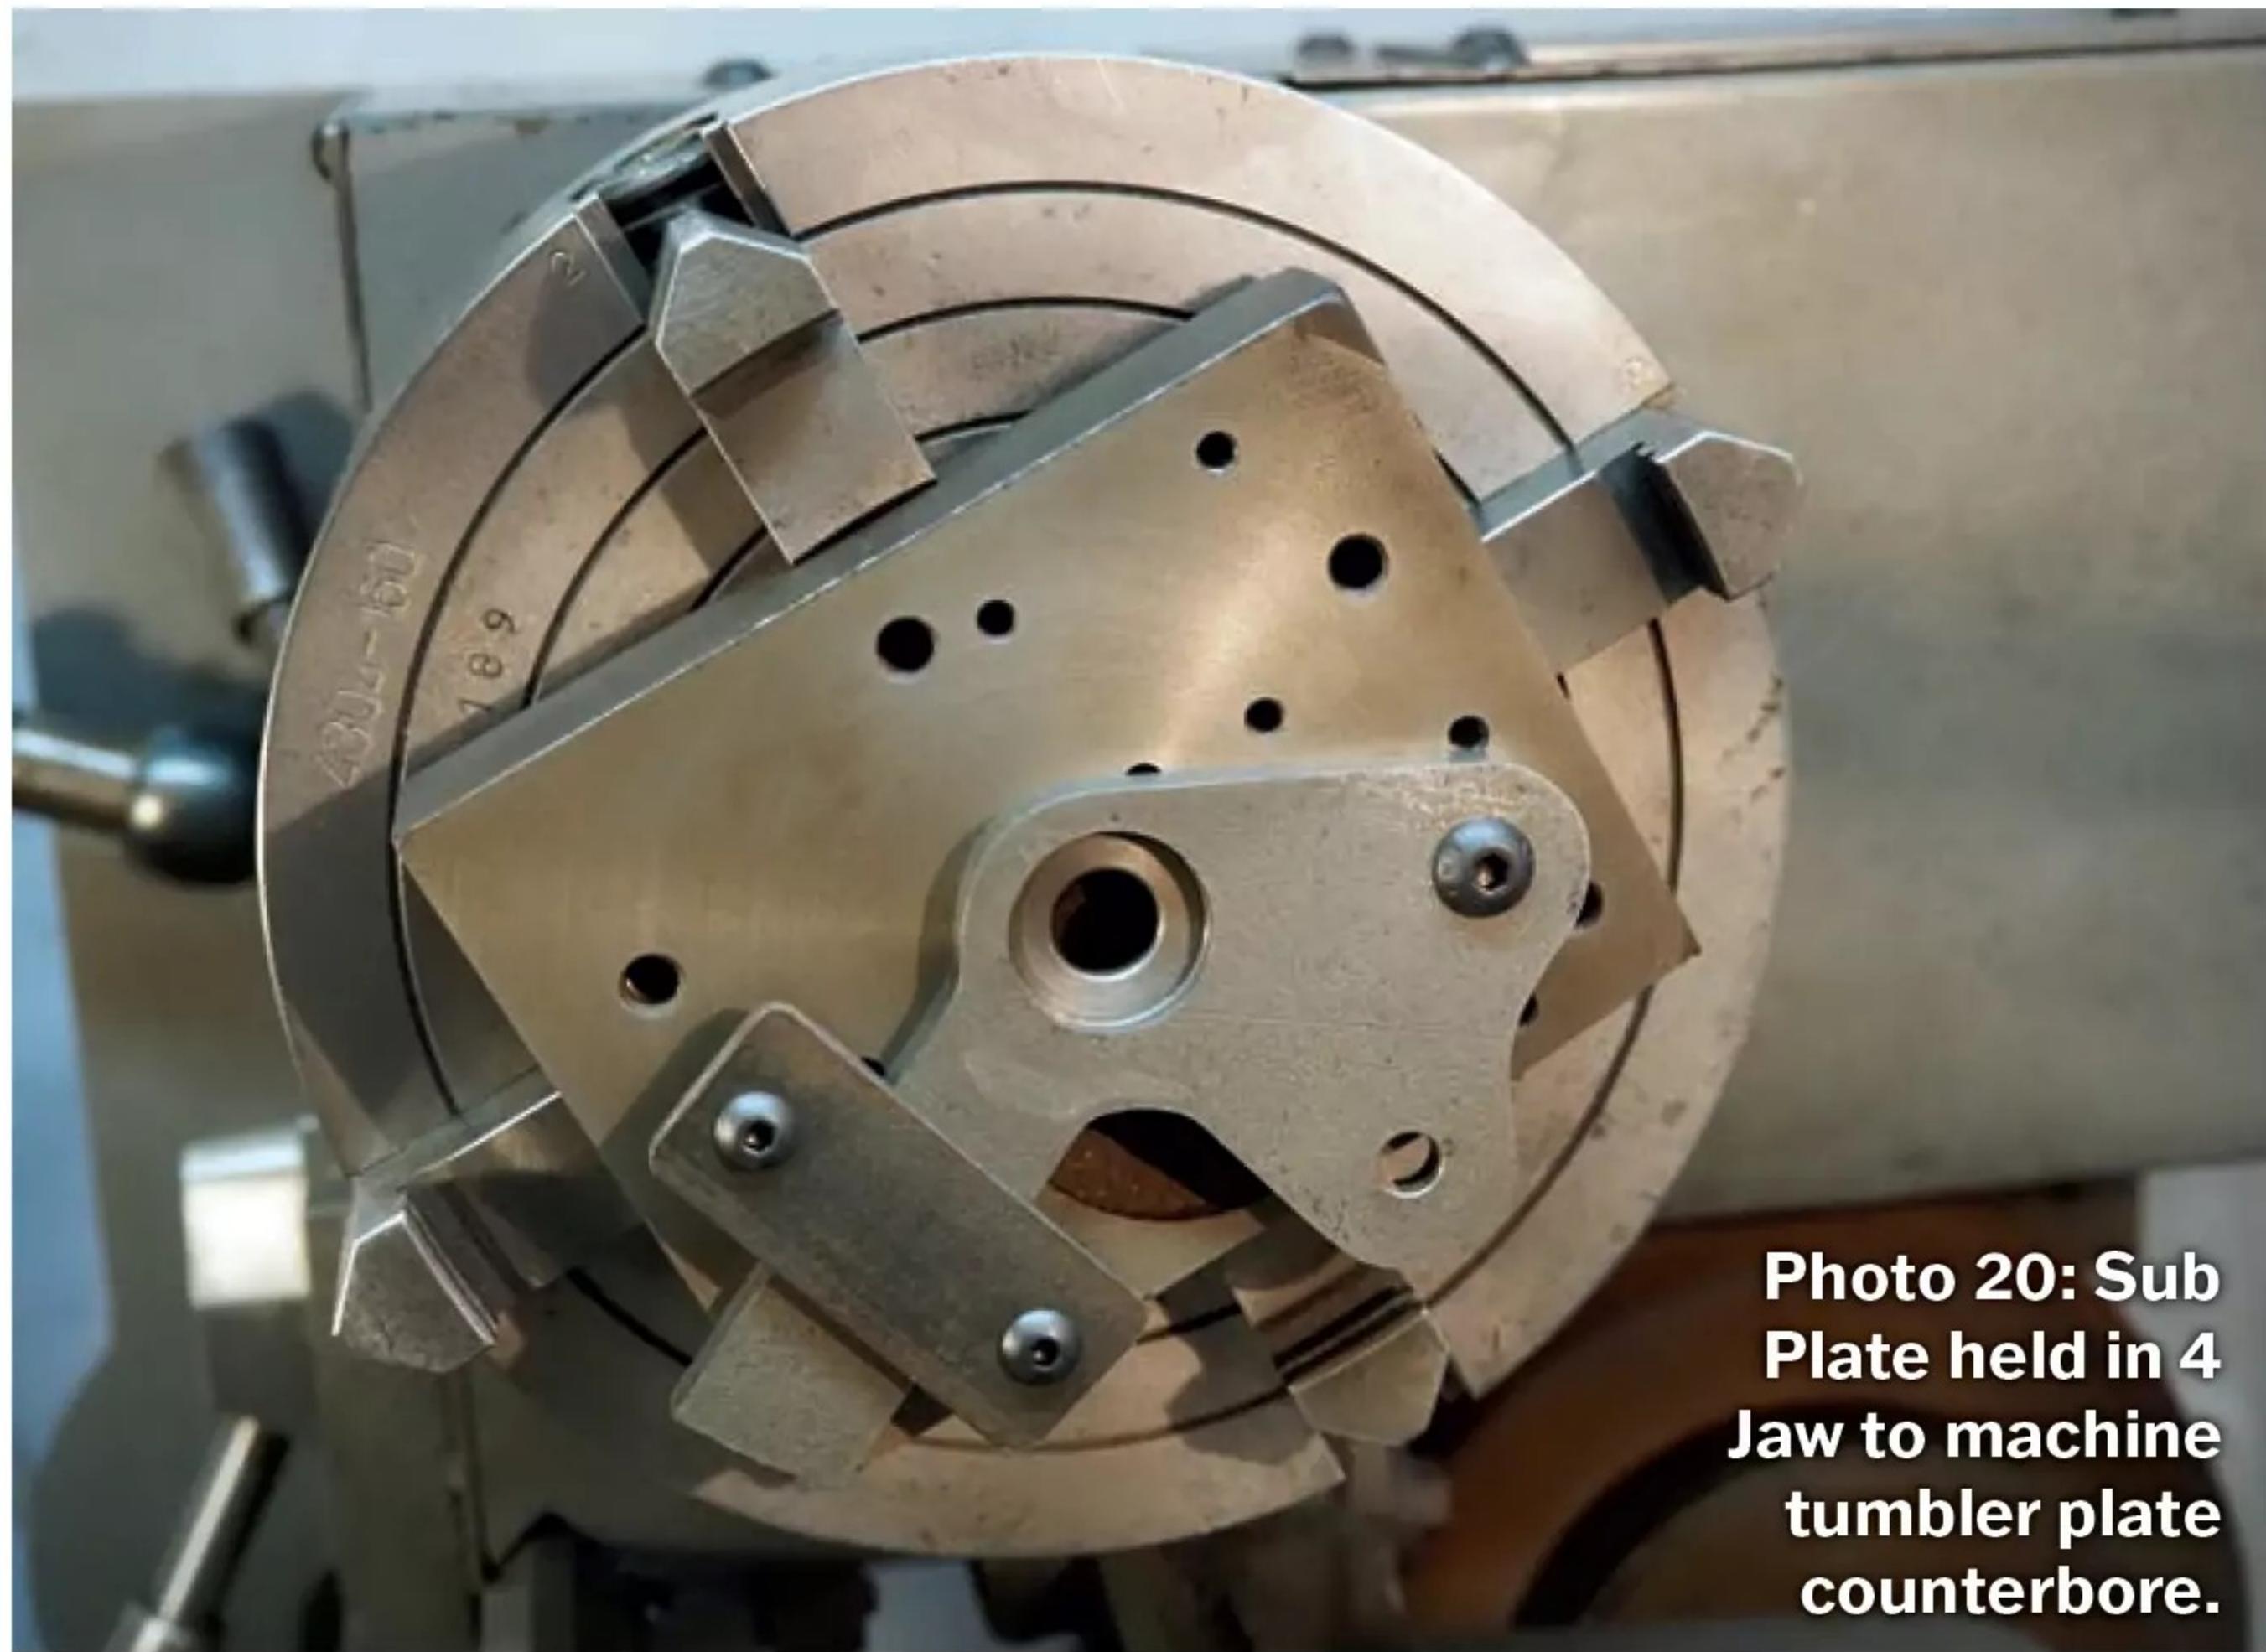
Sub Plate held in 4 Jaw to machine tumbler plate counterbore.
